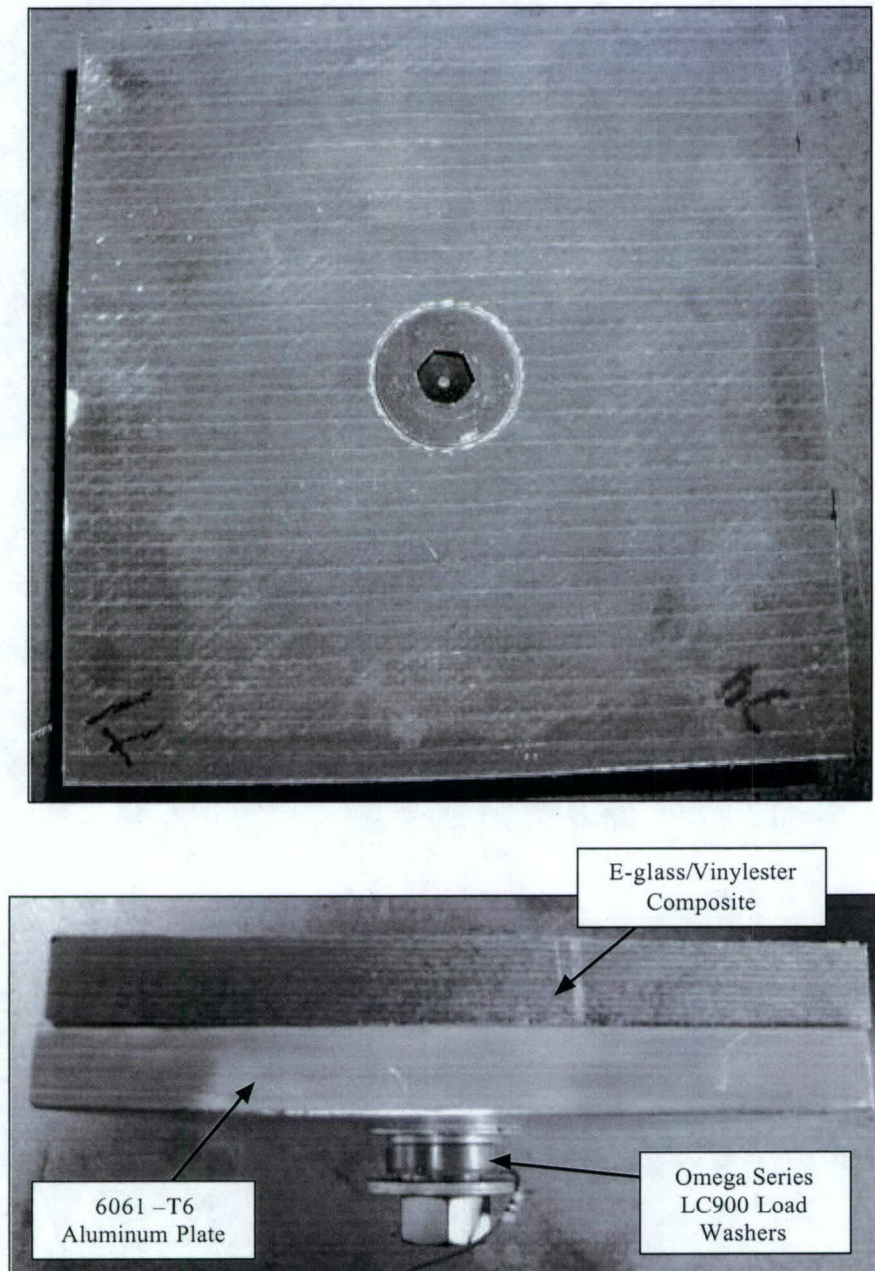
Tapered Bolts Fixture (Top and Side Views)
